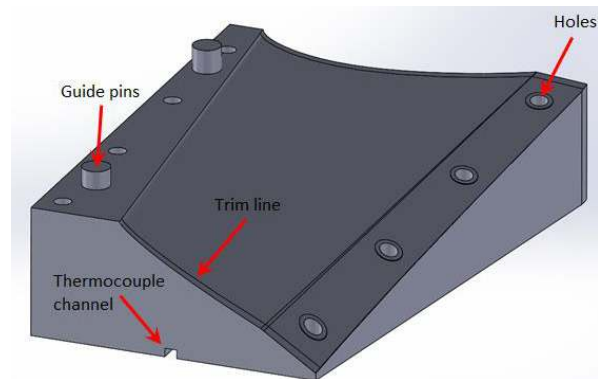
Tool features that typically must be removed or redesigned for FDM.
